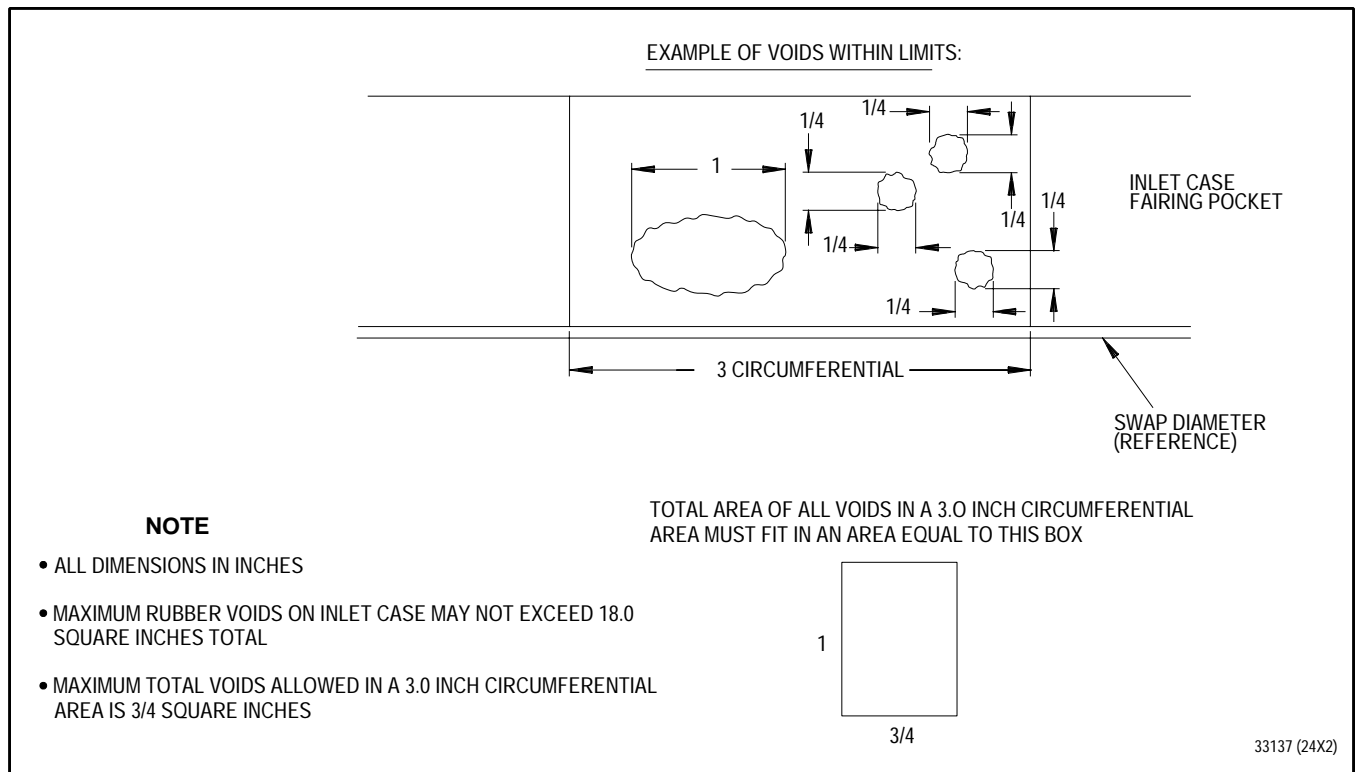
Fan Inlet Case - Fairing Rubber Inspection
